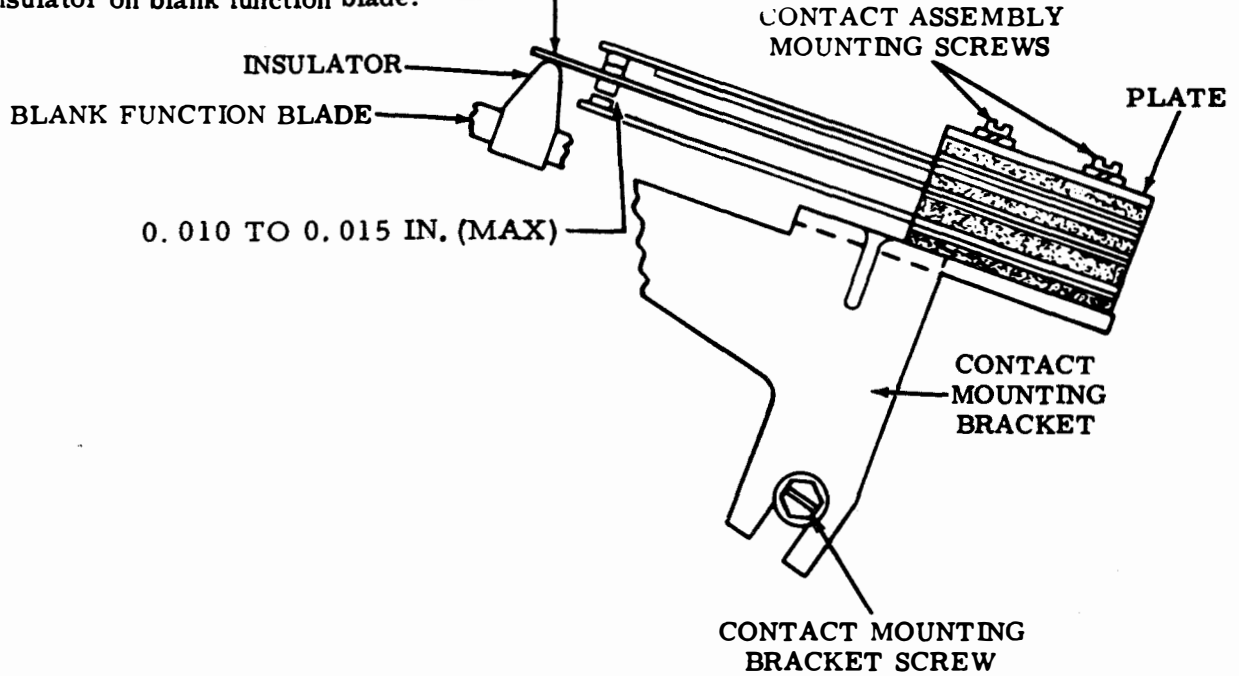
Contact Assembly and Contact Gap - Right Side View
